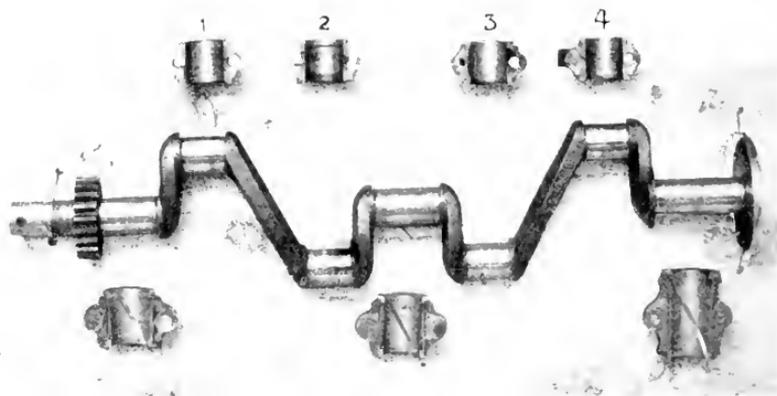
Crank Pins and Main Bearings of an Automobile After 20,000 Miles Service. Connecting Rod Bearings Equipped with Genelite. The main bearings showed decided wear, while the crank pins were barely polished and the connecting rod bearings had not come to a full seat
